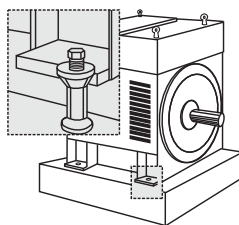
Motor mounted on a concrete base with foundation studs.
